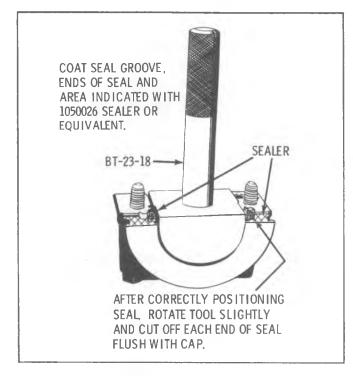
Installing Rear Main Oil Seal (Lower Half)
